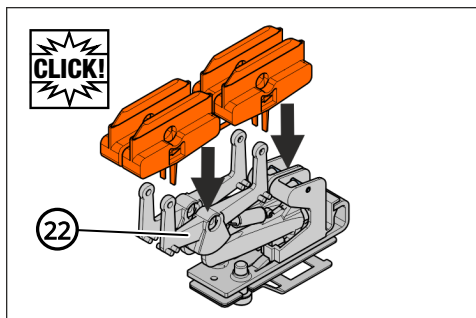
Slide the new collector heads onto the balance until an audible engagement into place is heard. The collector heads must be firmly connected to the balance.
